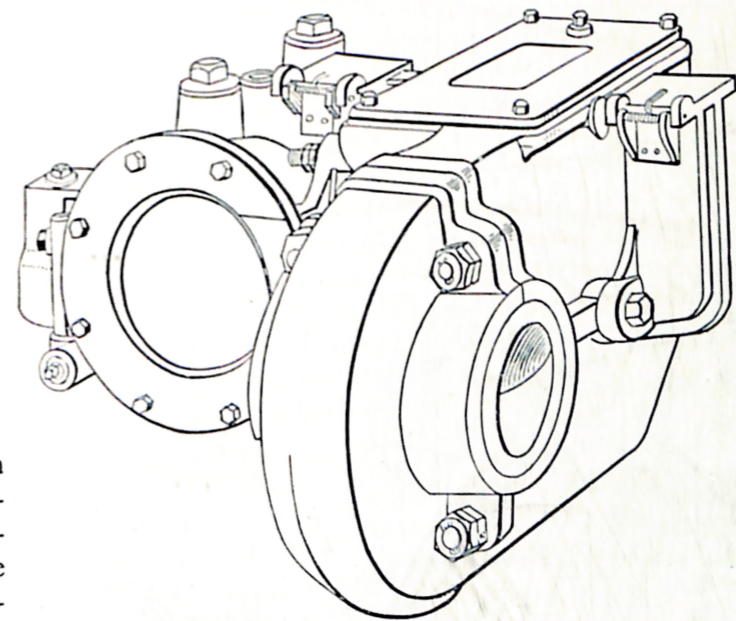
Westinghouse Brake Company's Geared Compressor
